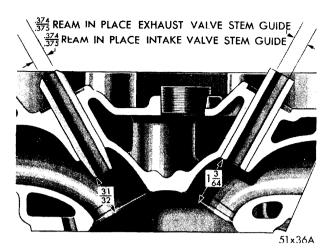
Exhaust and Intake Valve Guide Installed in Head (FirePower)
